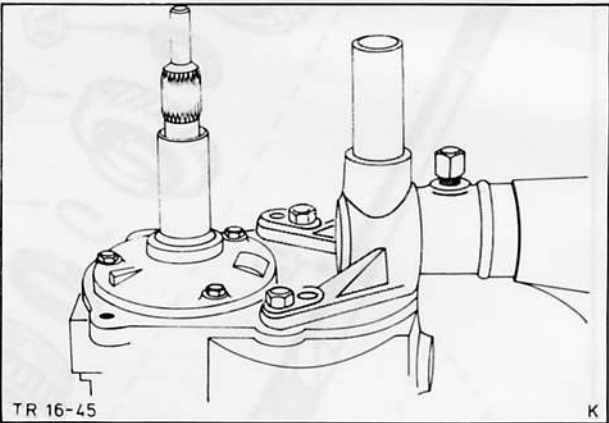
Secure gearbox to stand with Special Tool No. 16-009
